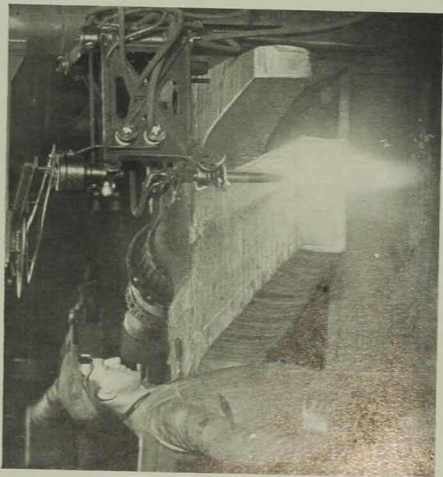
Heavy Steel Forging being shaped by the Oxygen-Acetylene Cutting Machine at the Works of Messrs. Walter Somers, (Courtesy, Messrs. British Oxygen Co., Ltd., London.)
